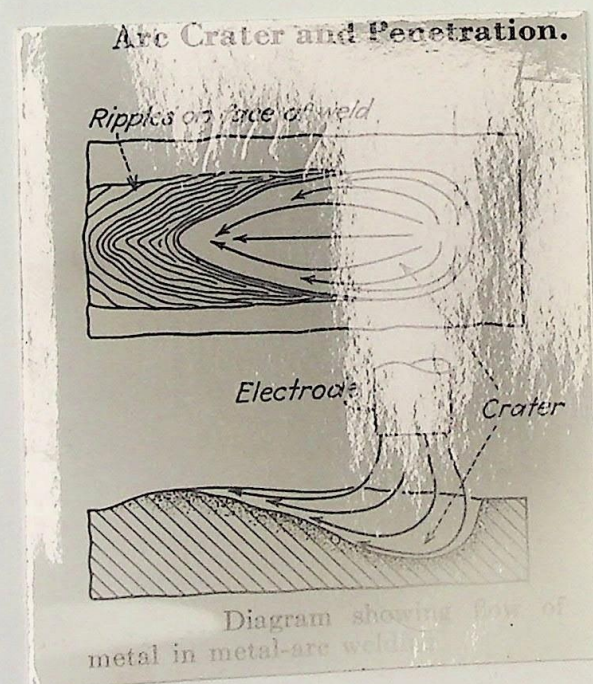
Diagram showing flow of metal in metal-arc welding.
